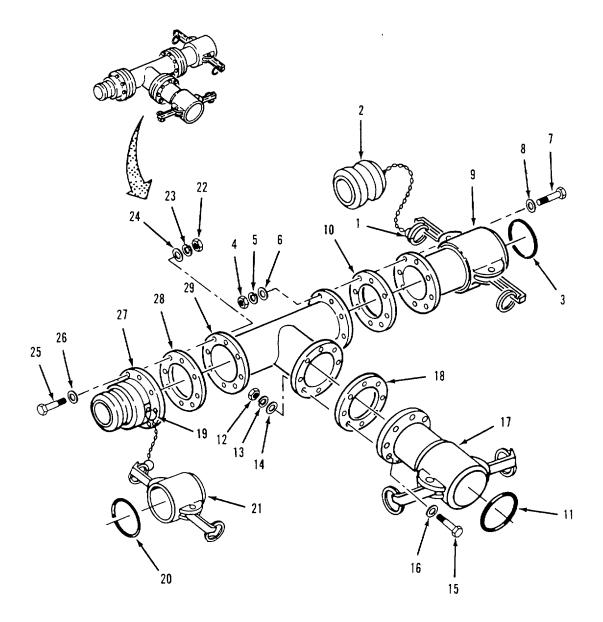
Tee Assembly (9115-Y) Disassembly.
